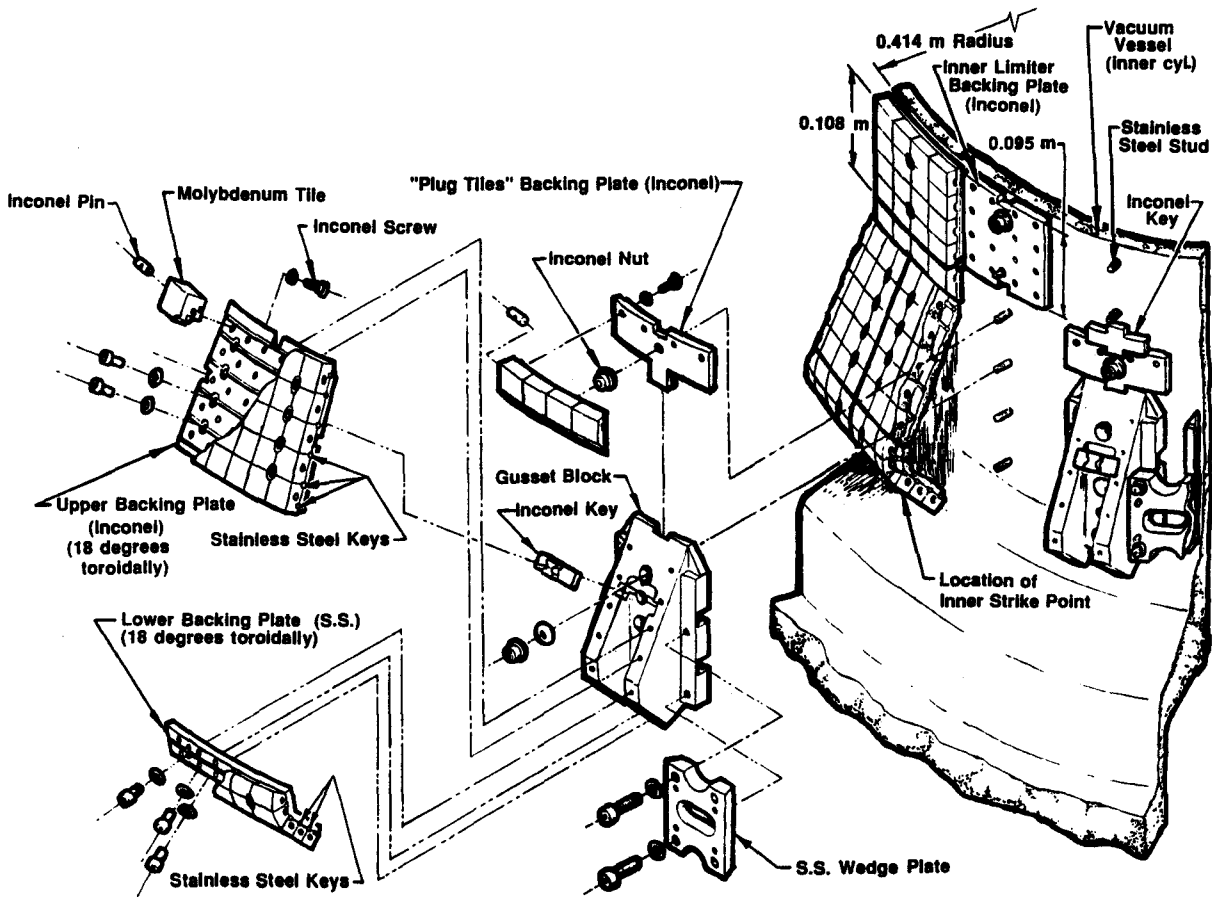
Portion of shaped divertor assembly about inner strike-point
